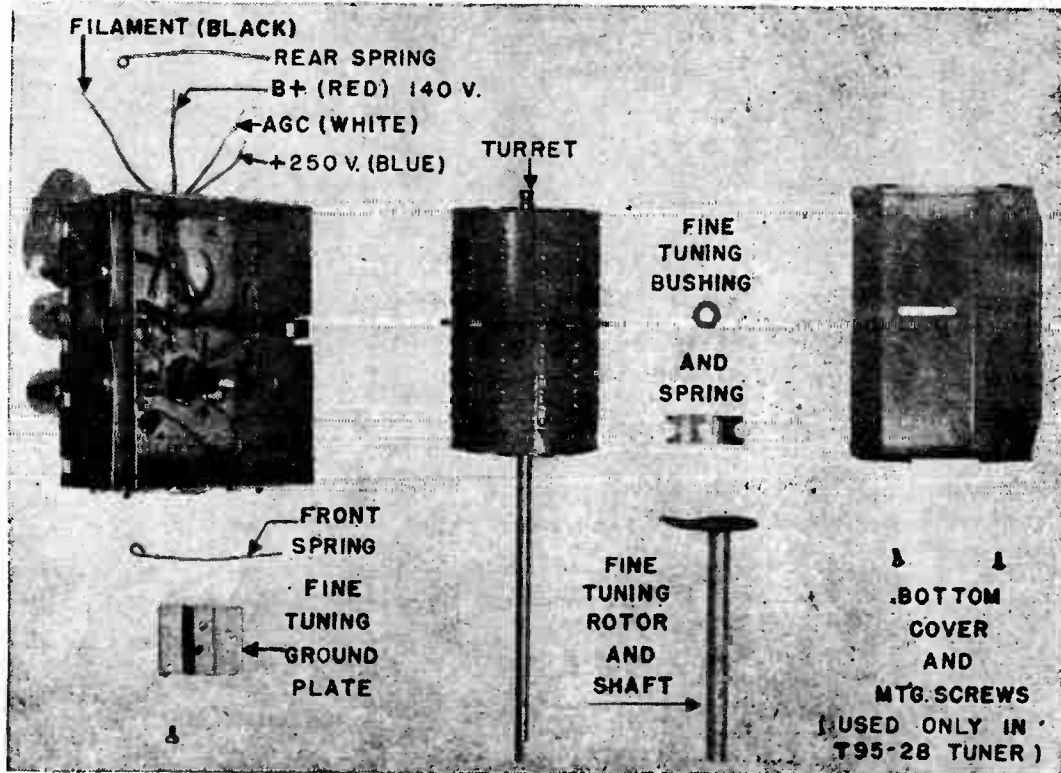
Disassembled View of T95-29 and T95-30 R.F. (Cascade) Tuners.
